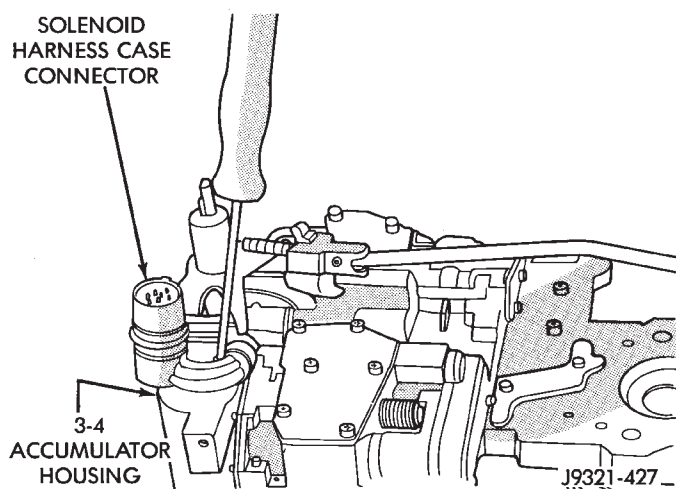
Solenoid Harness Case Connector Shoulder Bolt
